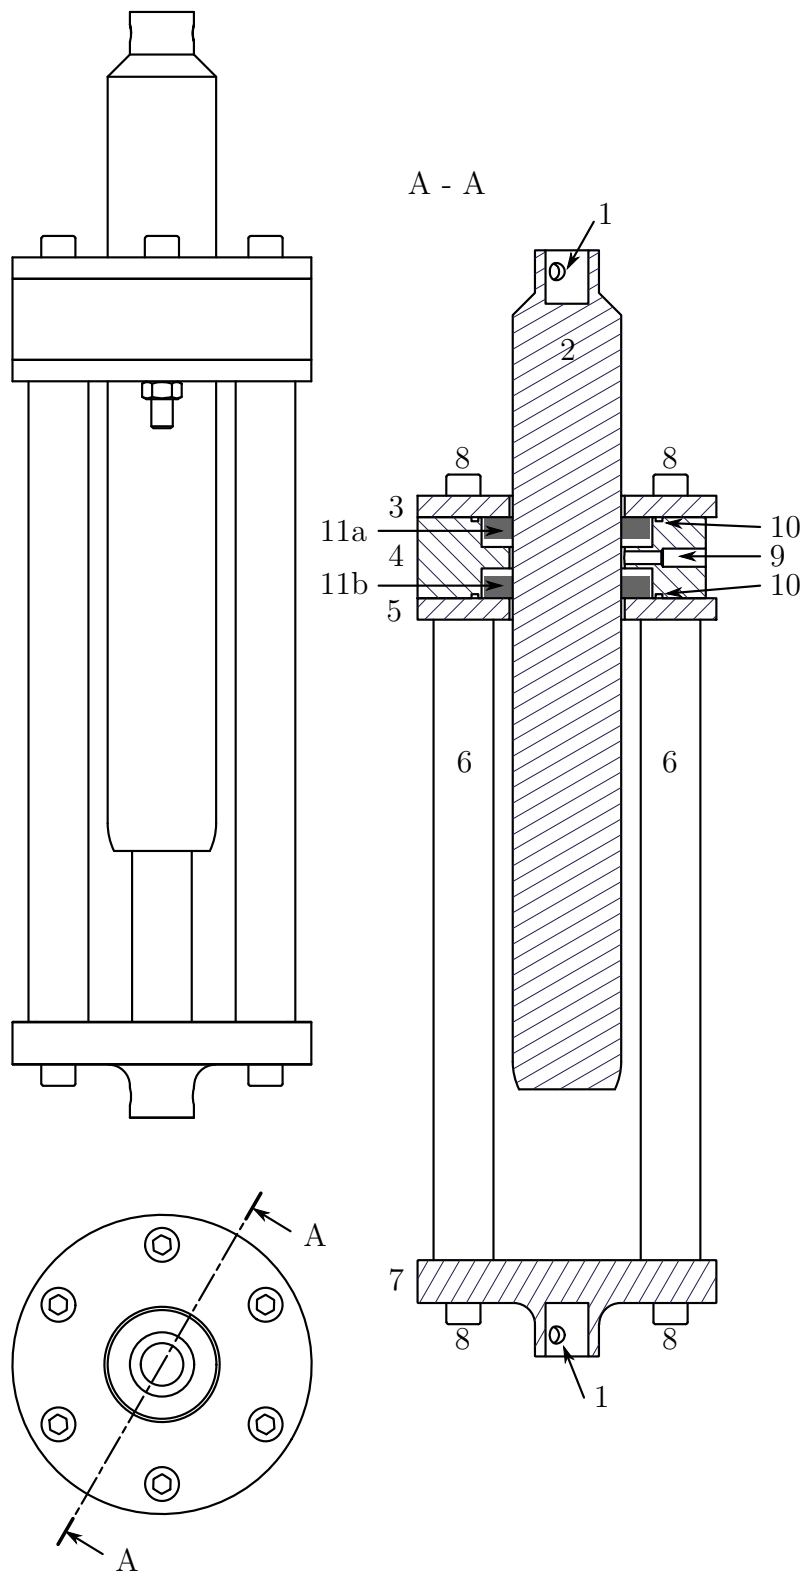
Side and top view of the friction testing device, including a cut, where all parts are named. (1) pin hole, fixture to the force measurement device, (2) rod, (3) top flange, (4) T-cup, (5) bottom flange, (6) columns, (7) bottom fixture to the testing machine, (8) screw, (9) pressure inlet, (10) O-ring groove, (11a) upper ring, (11b) lower ring.
